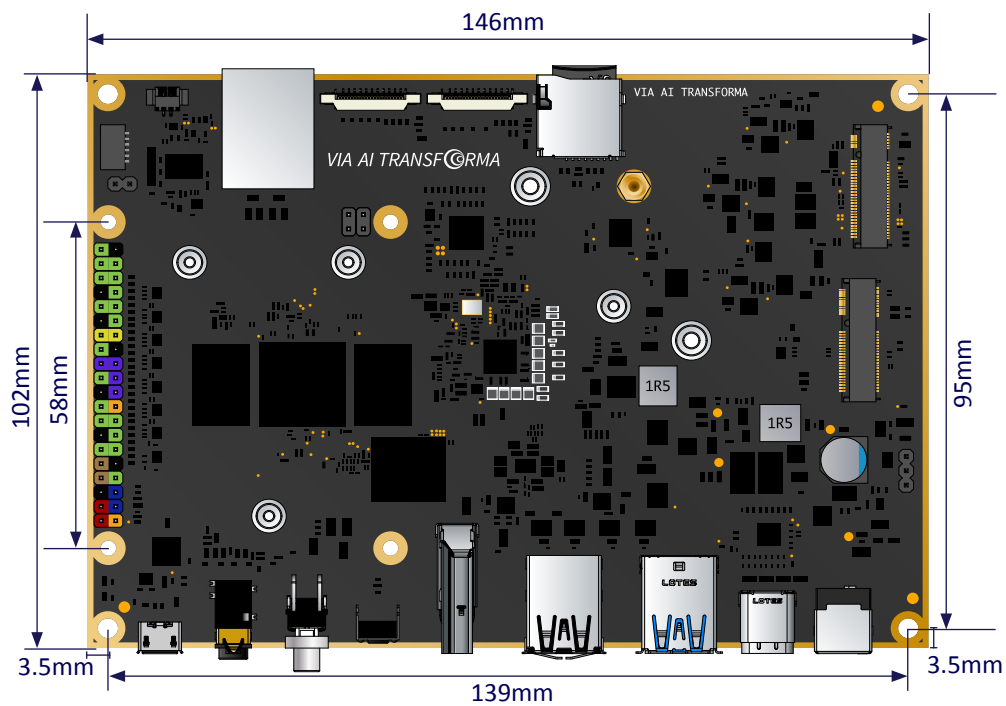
Dimensions of the VIA AI Transforma Model 1 board (top I/O)
